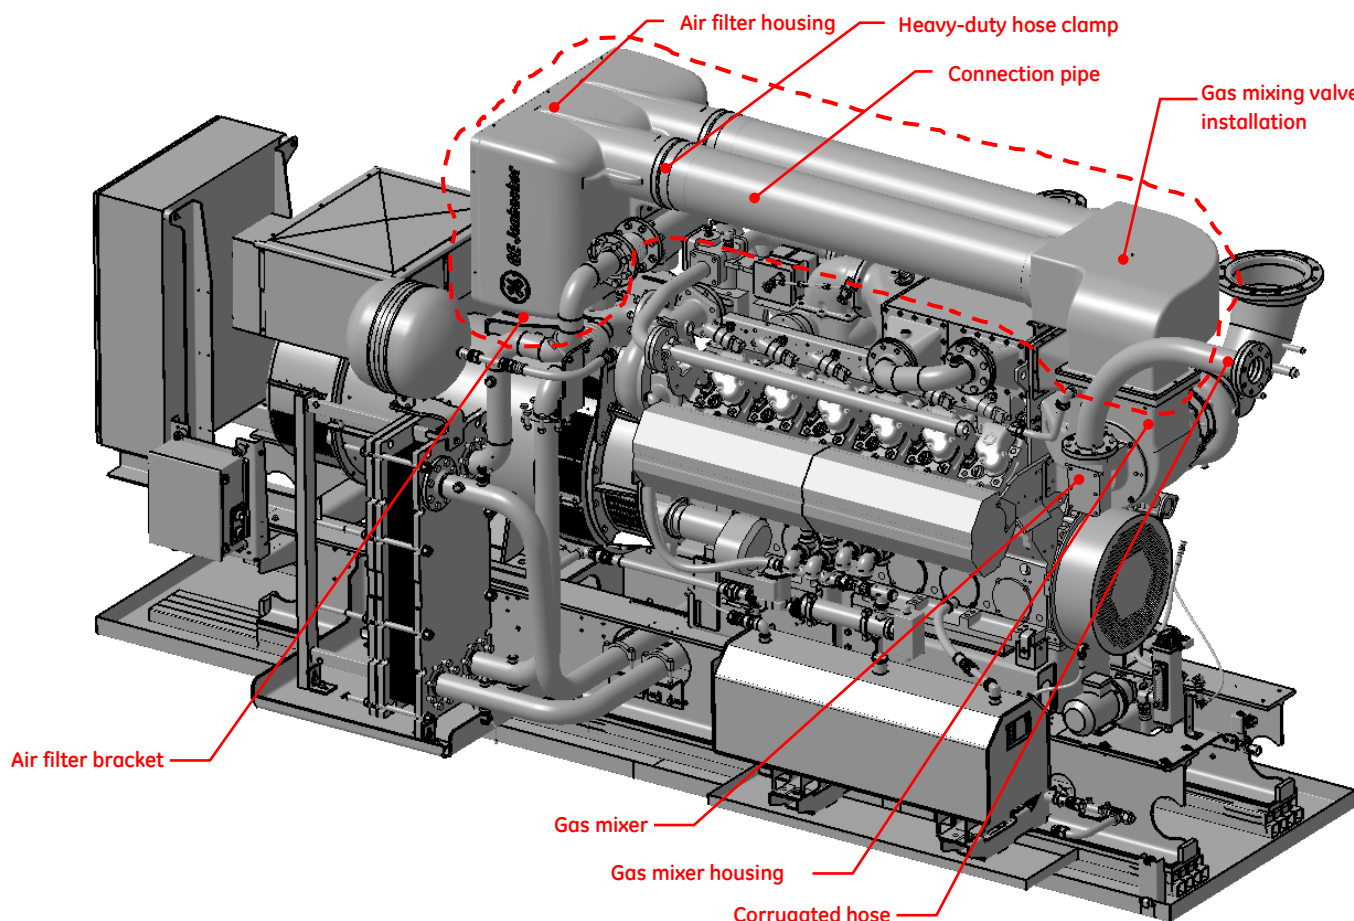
Removing the connecting pipe, air filter and air filter bracket
